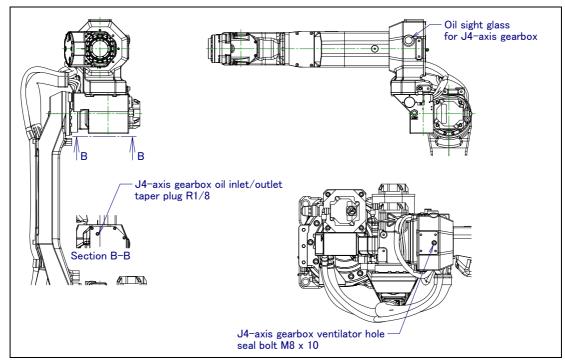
(b) Greasing point of J4-axis gearbox
